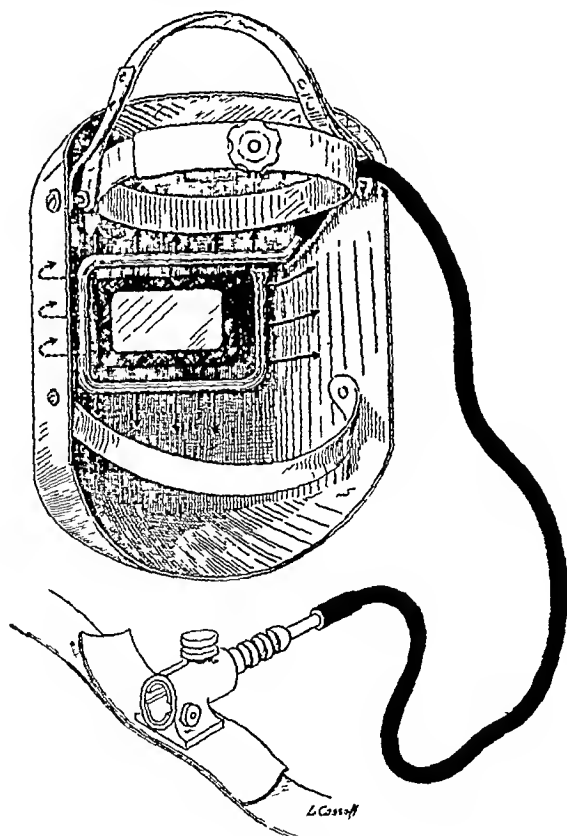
Compressed air unit for ventilating welder's hood. Metal tube, surrounding window, directs outward flowing spray of air.
